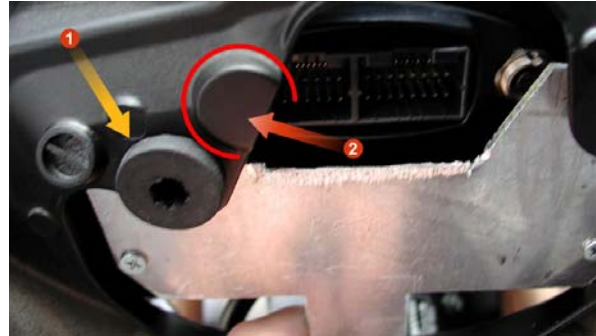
chassis to be milled (2) and anti-vibration mounting (1).
